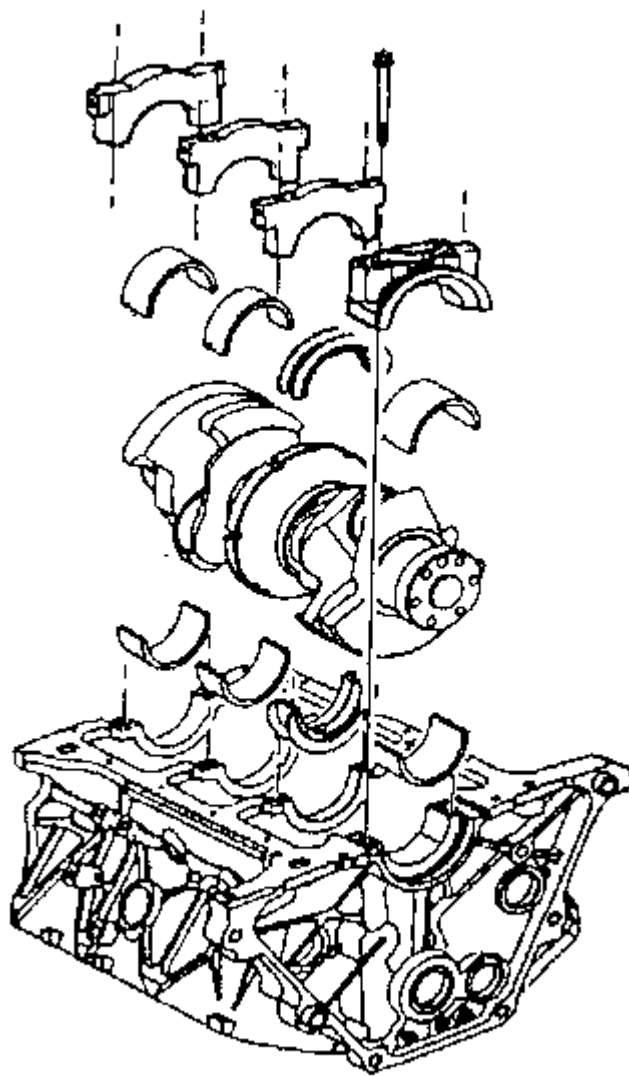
View Of Crankshaft, Main Bearings And Bearing Caps
